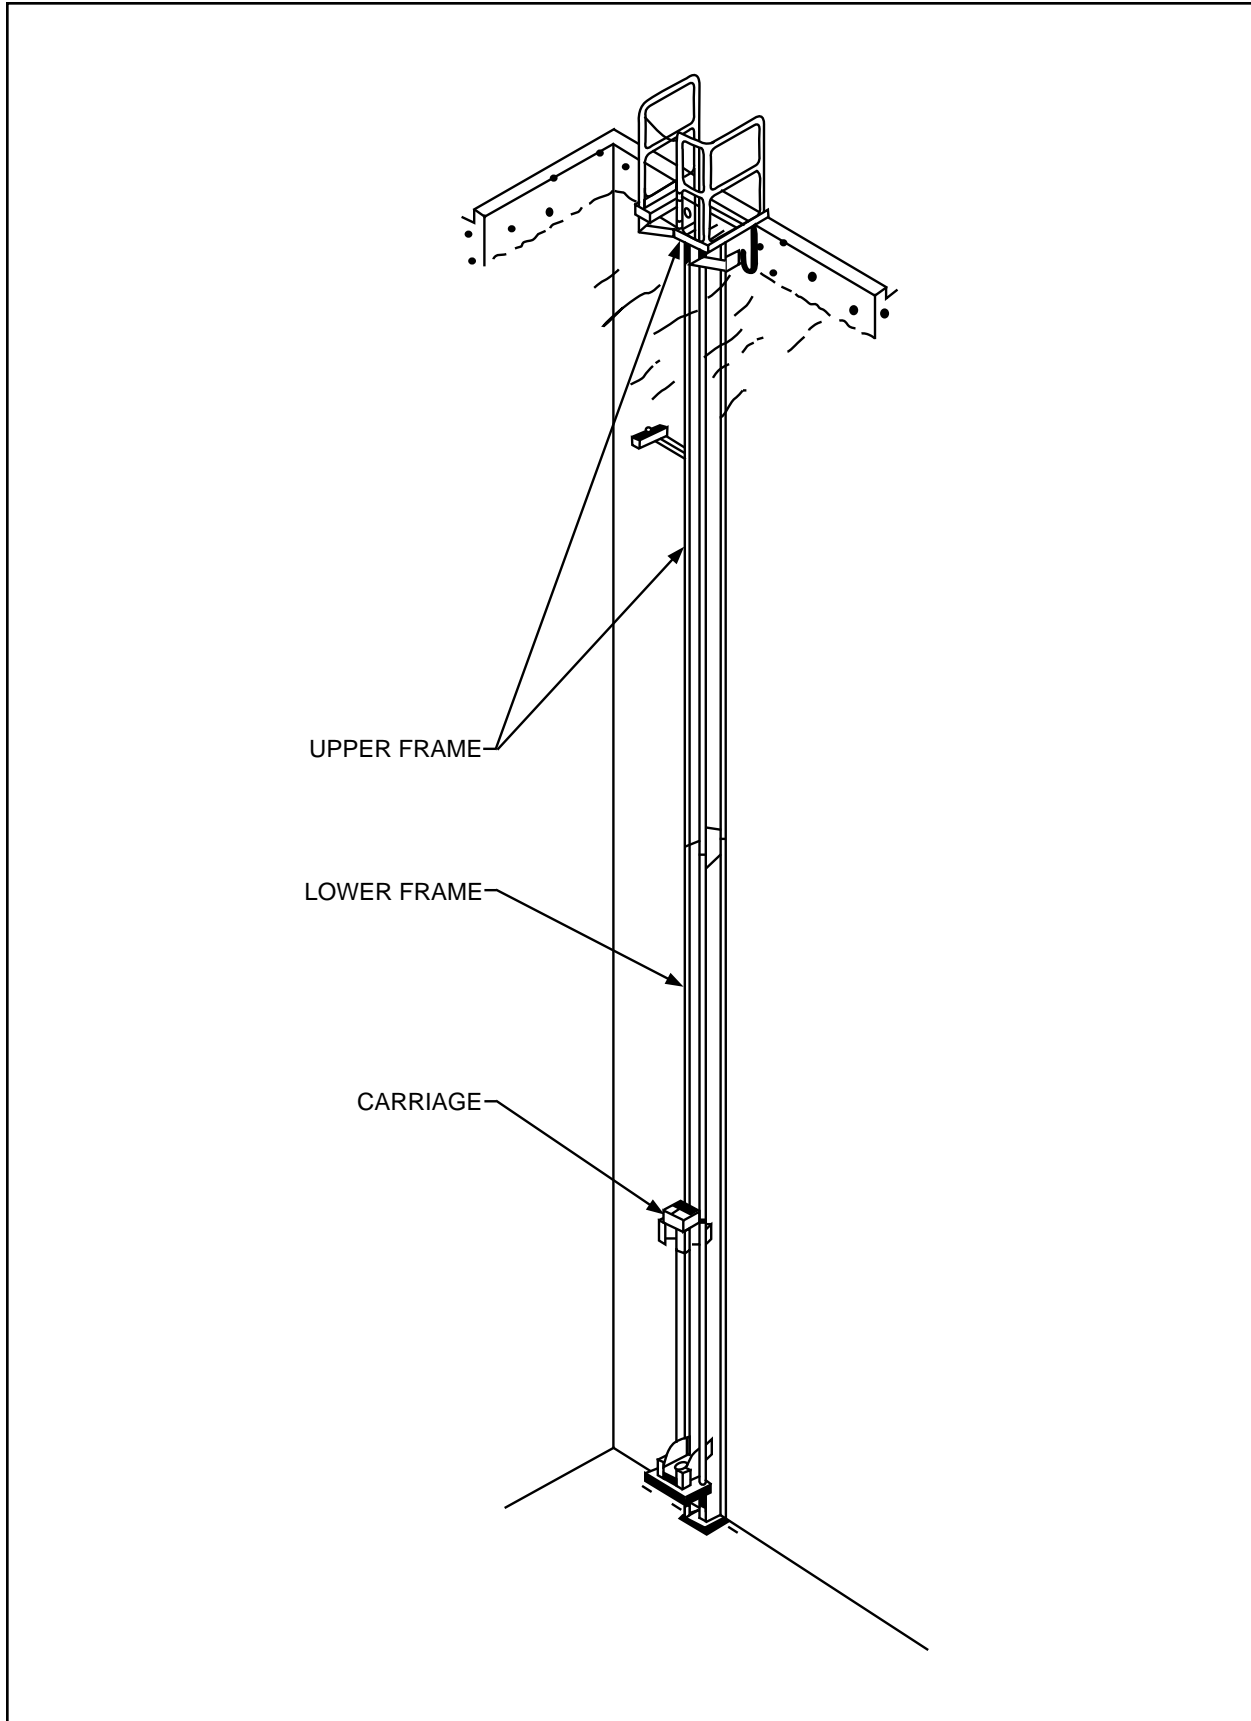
Fuel Preparation Machine Shown Installed in Facsimile Fuel Pool
